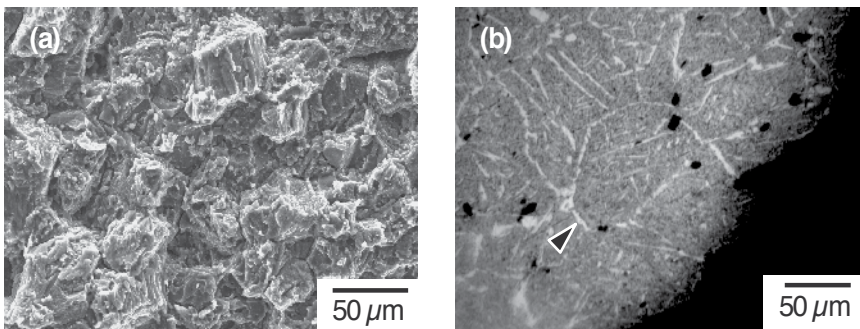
(a) Fracture surface, and (b) failure sub-surface on the TD plane of the LAZ1021-FSP specimen.
